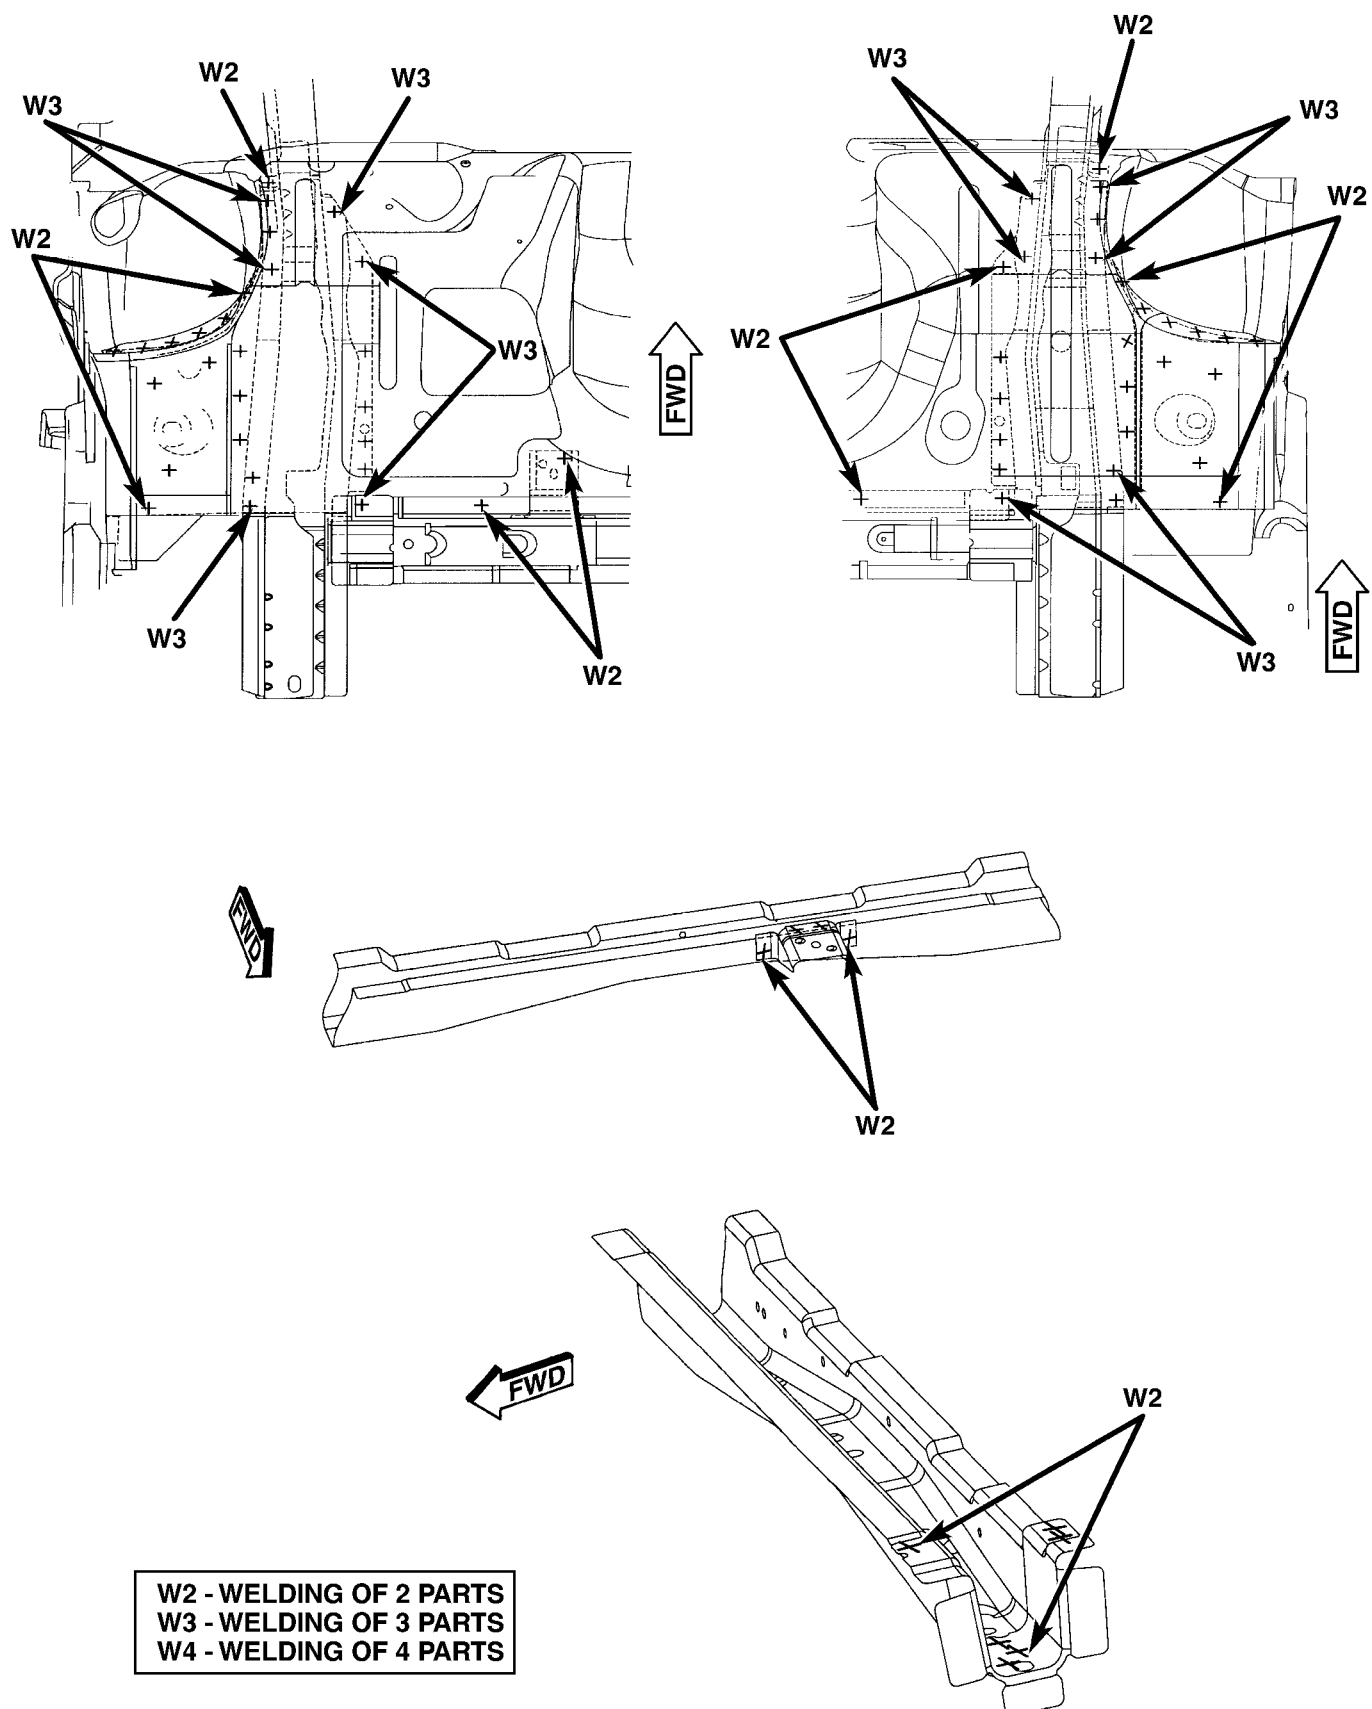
FRONT SIDE RAILS TO LOWER DASH PANEL
